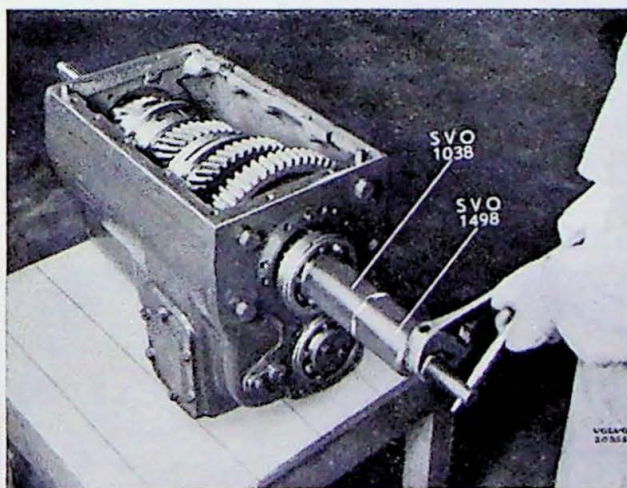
33. Fitting the rear bearing on the mainshaft.
